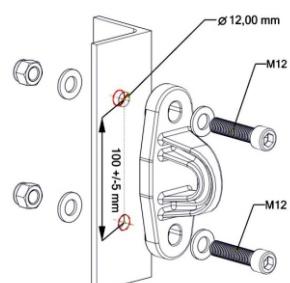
Method of screwing anchor point on steel structure using torque wrench
